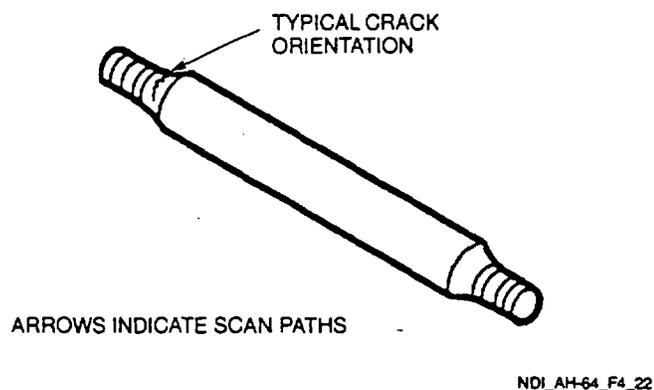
Engine Access and Ventilation Door Assembly Rig Connecting Link
